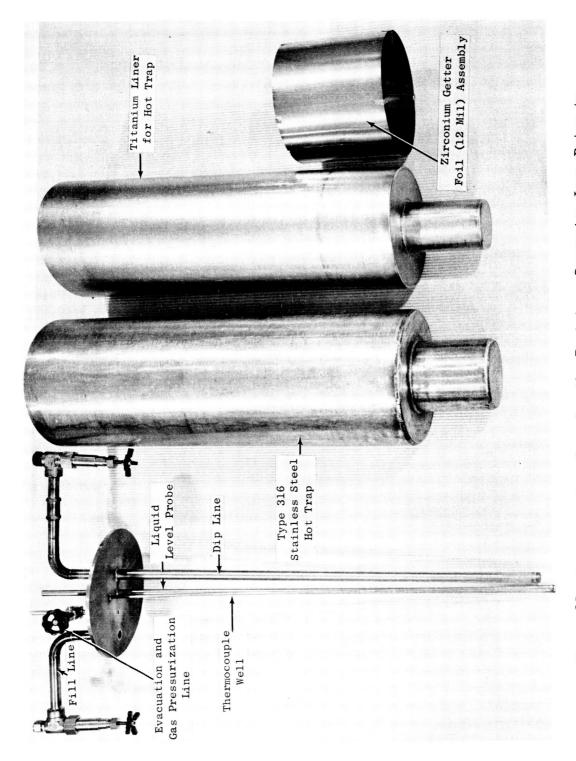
Potassium Hot Trap for the Prototype Corrosion Loop Prior to Type 316 Stainless Steel Container (10" Schedule 40 Pipe), Titanium Liner (0.040" Thick) and Zirconium Foil (0.012" Thick) Are Shown. Assembly.
